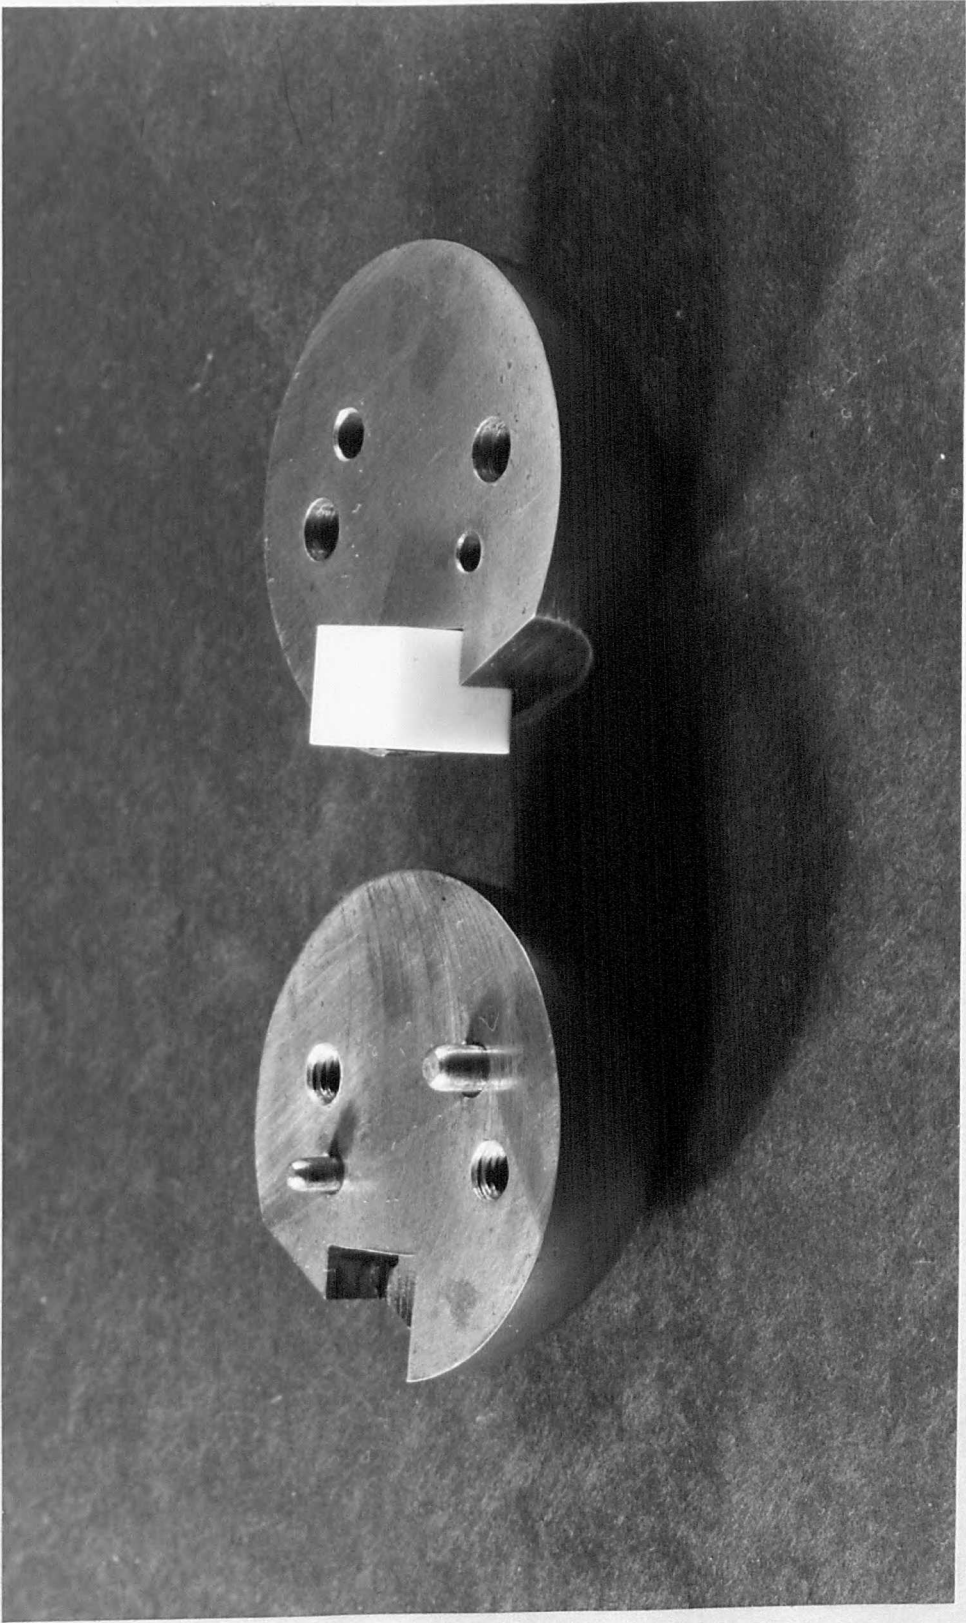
(c). Split spherical tool tip holder showing detail.
